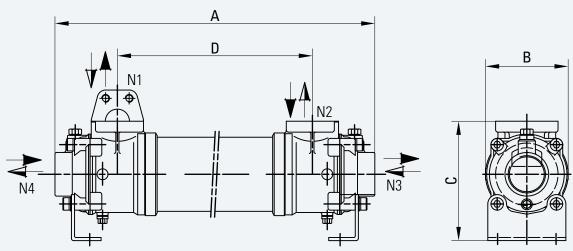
Fuel oil cooler for MDO operation DH3
